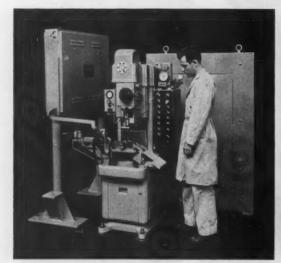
Bore of gear blank is finished true and to size on a "Microhoner"
